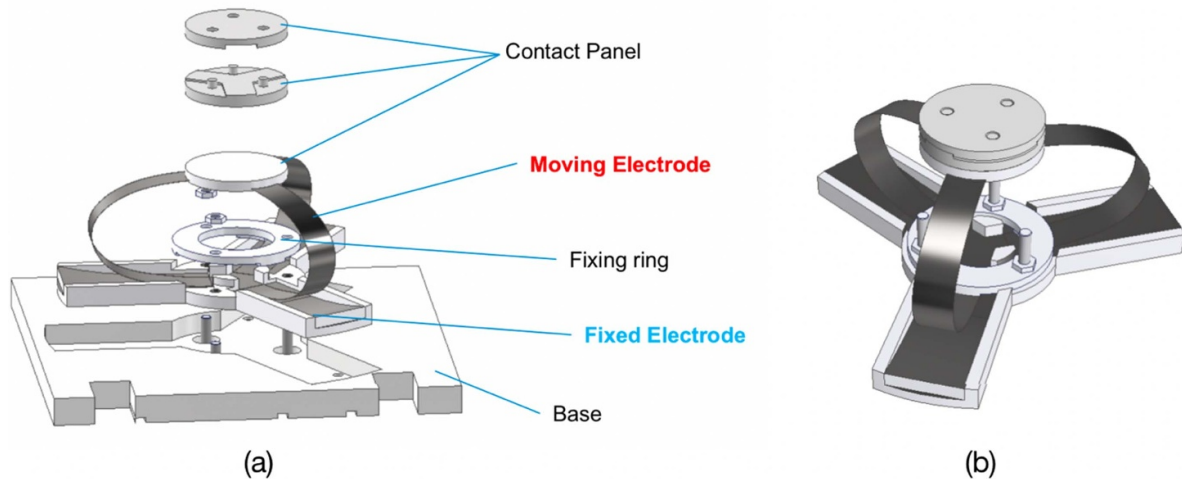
(a) An assembly drawing showing all components of the 3D-ElectroZip Touch. (b) Isometric view of the 3D-ElectroZip Touch device.
